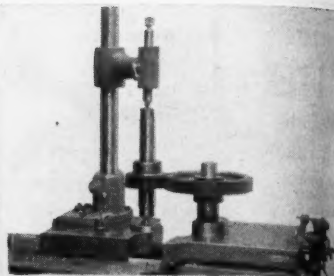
Parkson Gear Tester Set Up Testing Spur Gears With High Center Adjustment. Fig. 3.—Parkson Gear Tester Set Up For Testing Spiral Gears. Fig. 4.—Parkson Gear Tester Set Up For Checking A Worm Wheel, Which Are Shown In Phantom.
